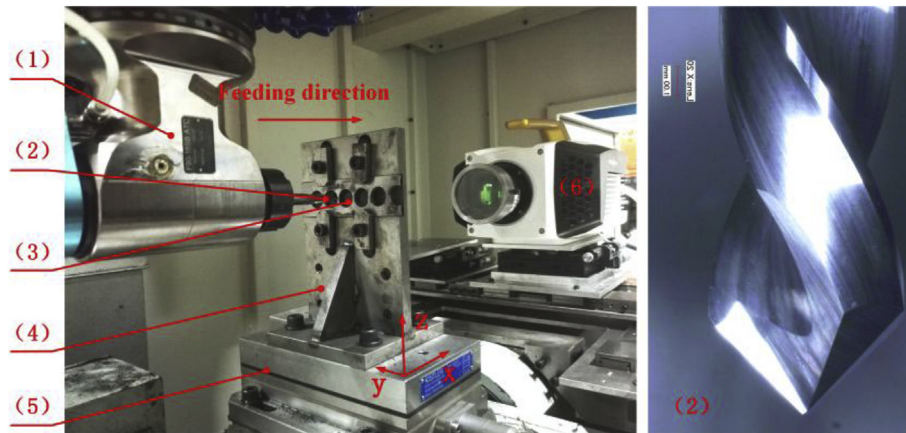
Experimental layout (1. 90° angle head, 2. small point angle twist drill, 3. CFRP workpiece, 4. fixture, 5. force dynamometer, 6. infrared camera).
